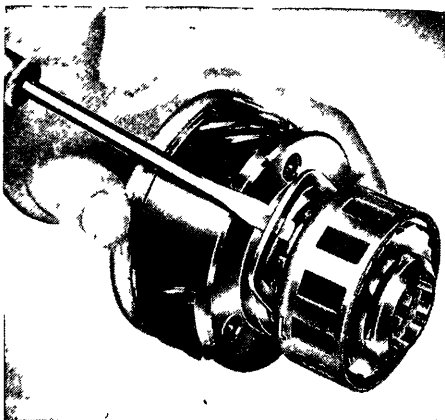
Separate pinion cage from free wheel unit by removing retaining clip
